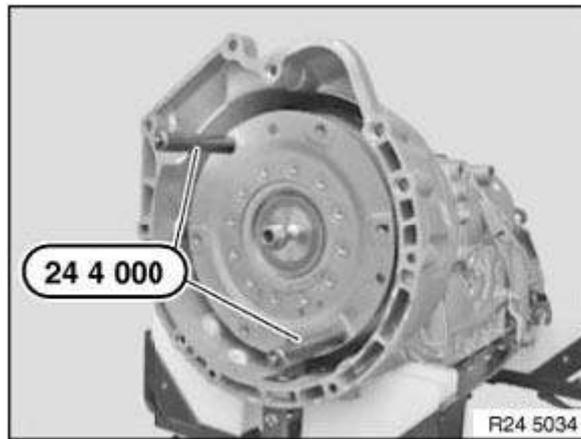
Screwing Special Tool 24 4 000 Into Torque Converter
